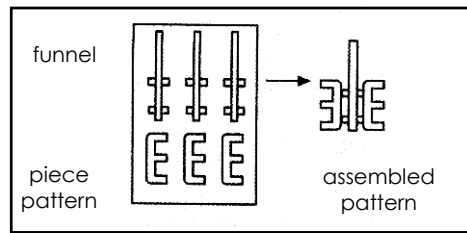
The components of a polystyrene pattern and the assembled pattern for mounting in the cast mould
